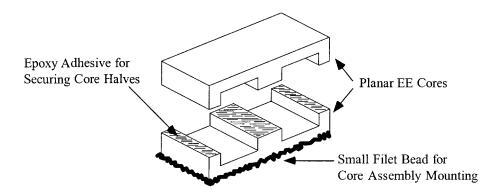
Epoxy Adhesive for Securing Transformer Assembly.
